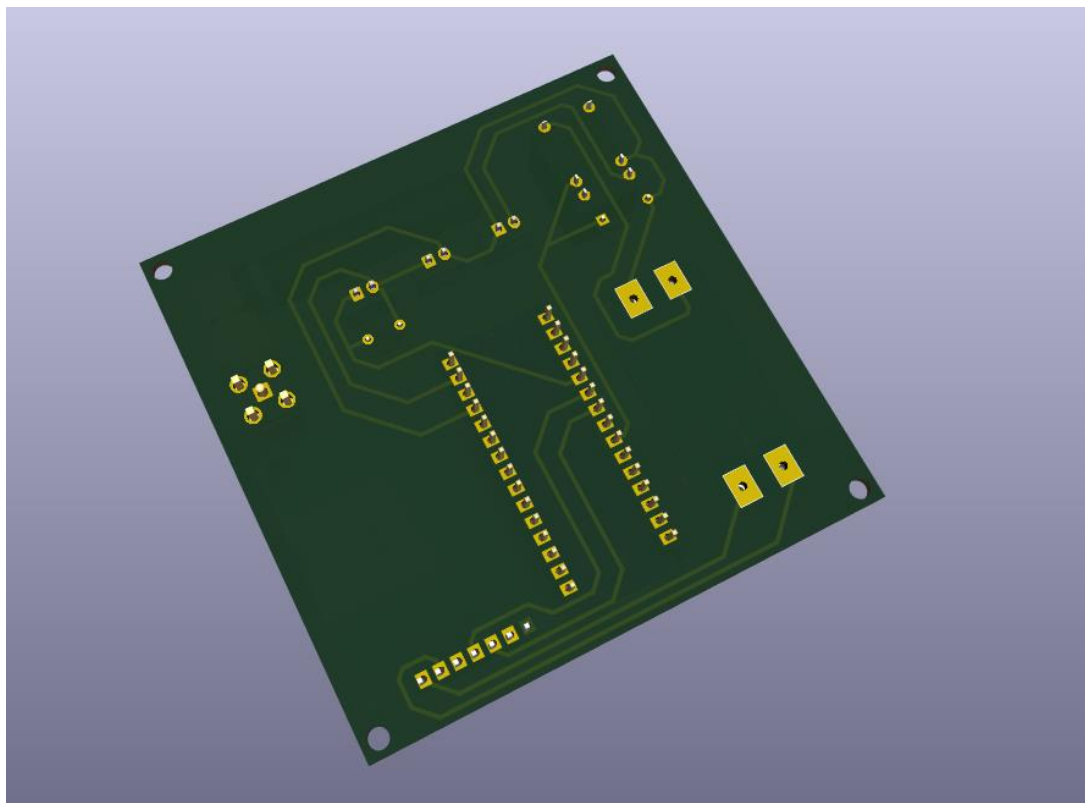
3D MODEL OF PCB BACK VIEW
